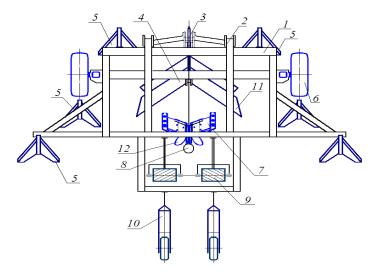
The structural scheme of the combined machine: 1 – frame; 2 – suspension device; 3 – disk-shaped knife; 4 - a double case with a guide plate in the form of a lister; 5 – flat cutter; 6 – support wheel; 7 – deep softener; 8 – fertiliser; 9 – reel; 10 – planting device; 11 – guide plate; 12 – slimmer
